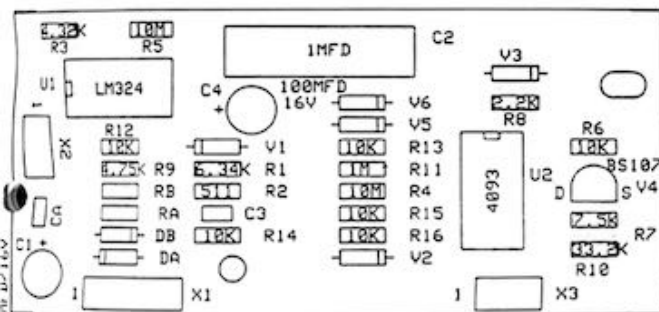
1-Ohm Board Layout (Board P/N 721-78-011)
